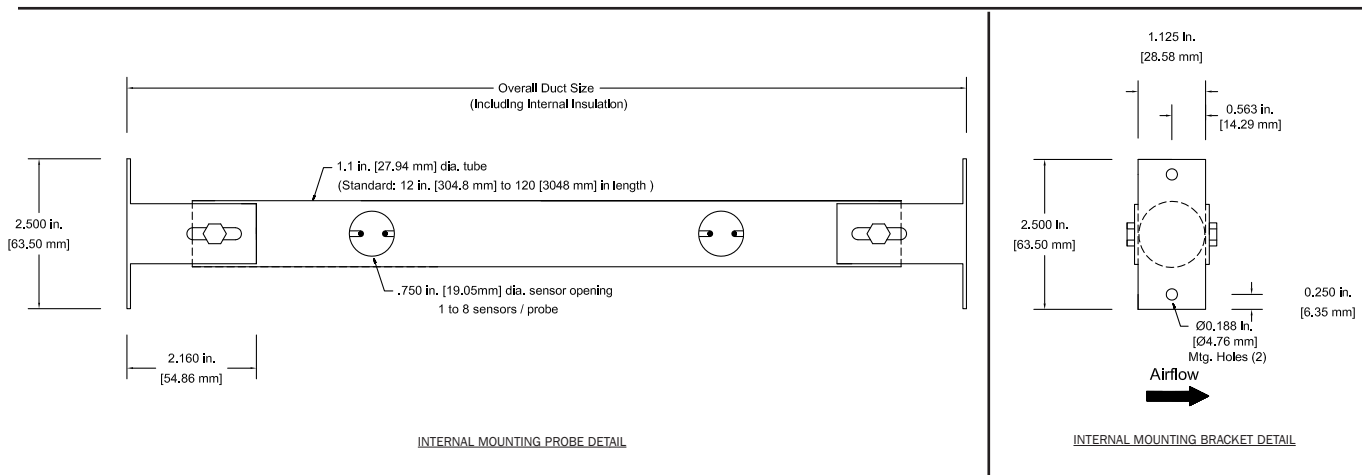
GP1 Internal Mount Probe Mechanical Dimensions
